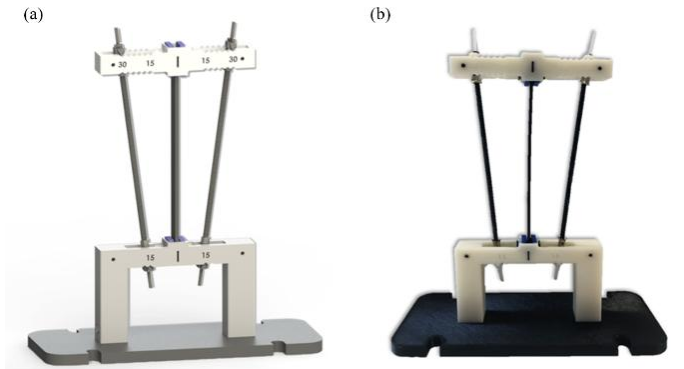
Assembled T-platform: (a) CAD Model, (b) first experimental prototype.
